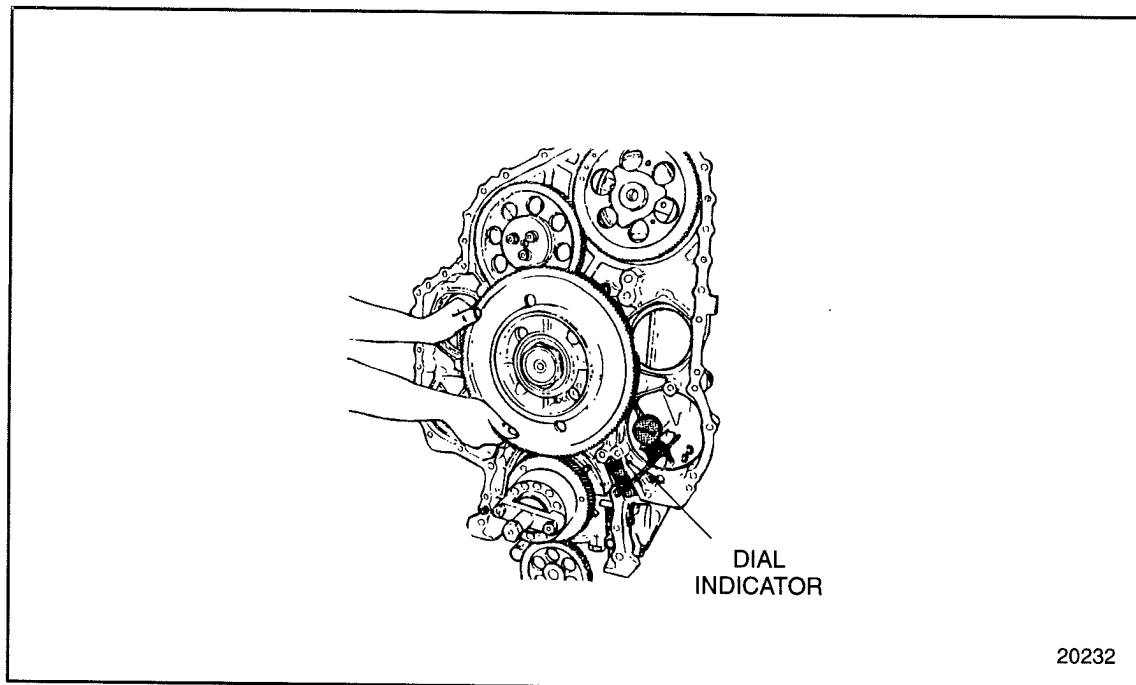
Crankshaft Timing Gear-to-Bull Gear Lash Measurement
